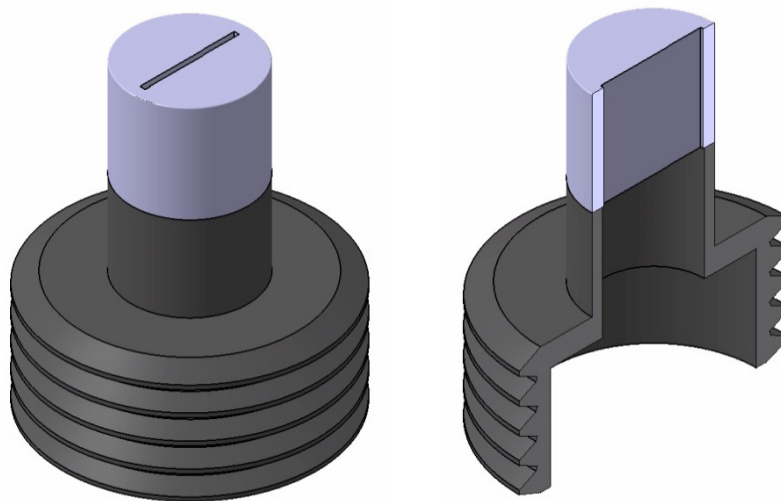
Bottom (left) and section (right) view of the rectangle long die.
